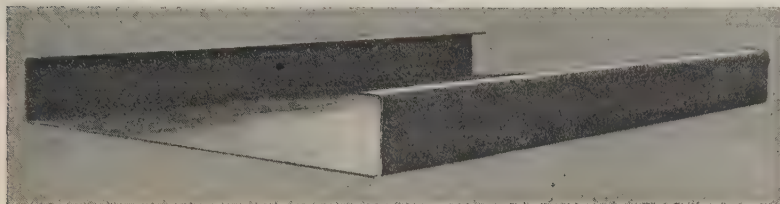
HORIZONTAL ANGULAR BENDS PROVIDED BY PRESS-BENDING
